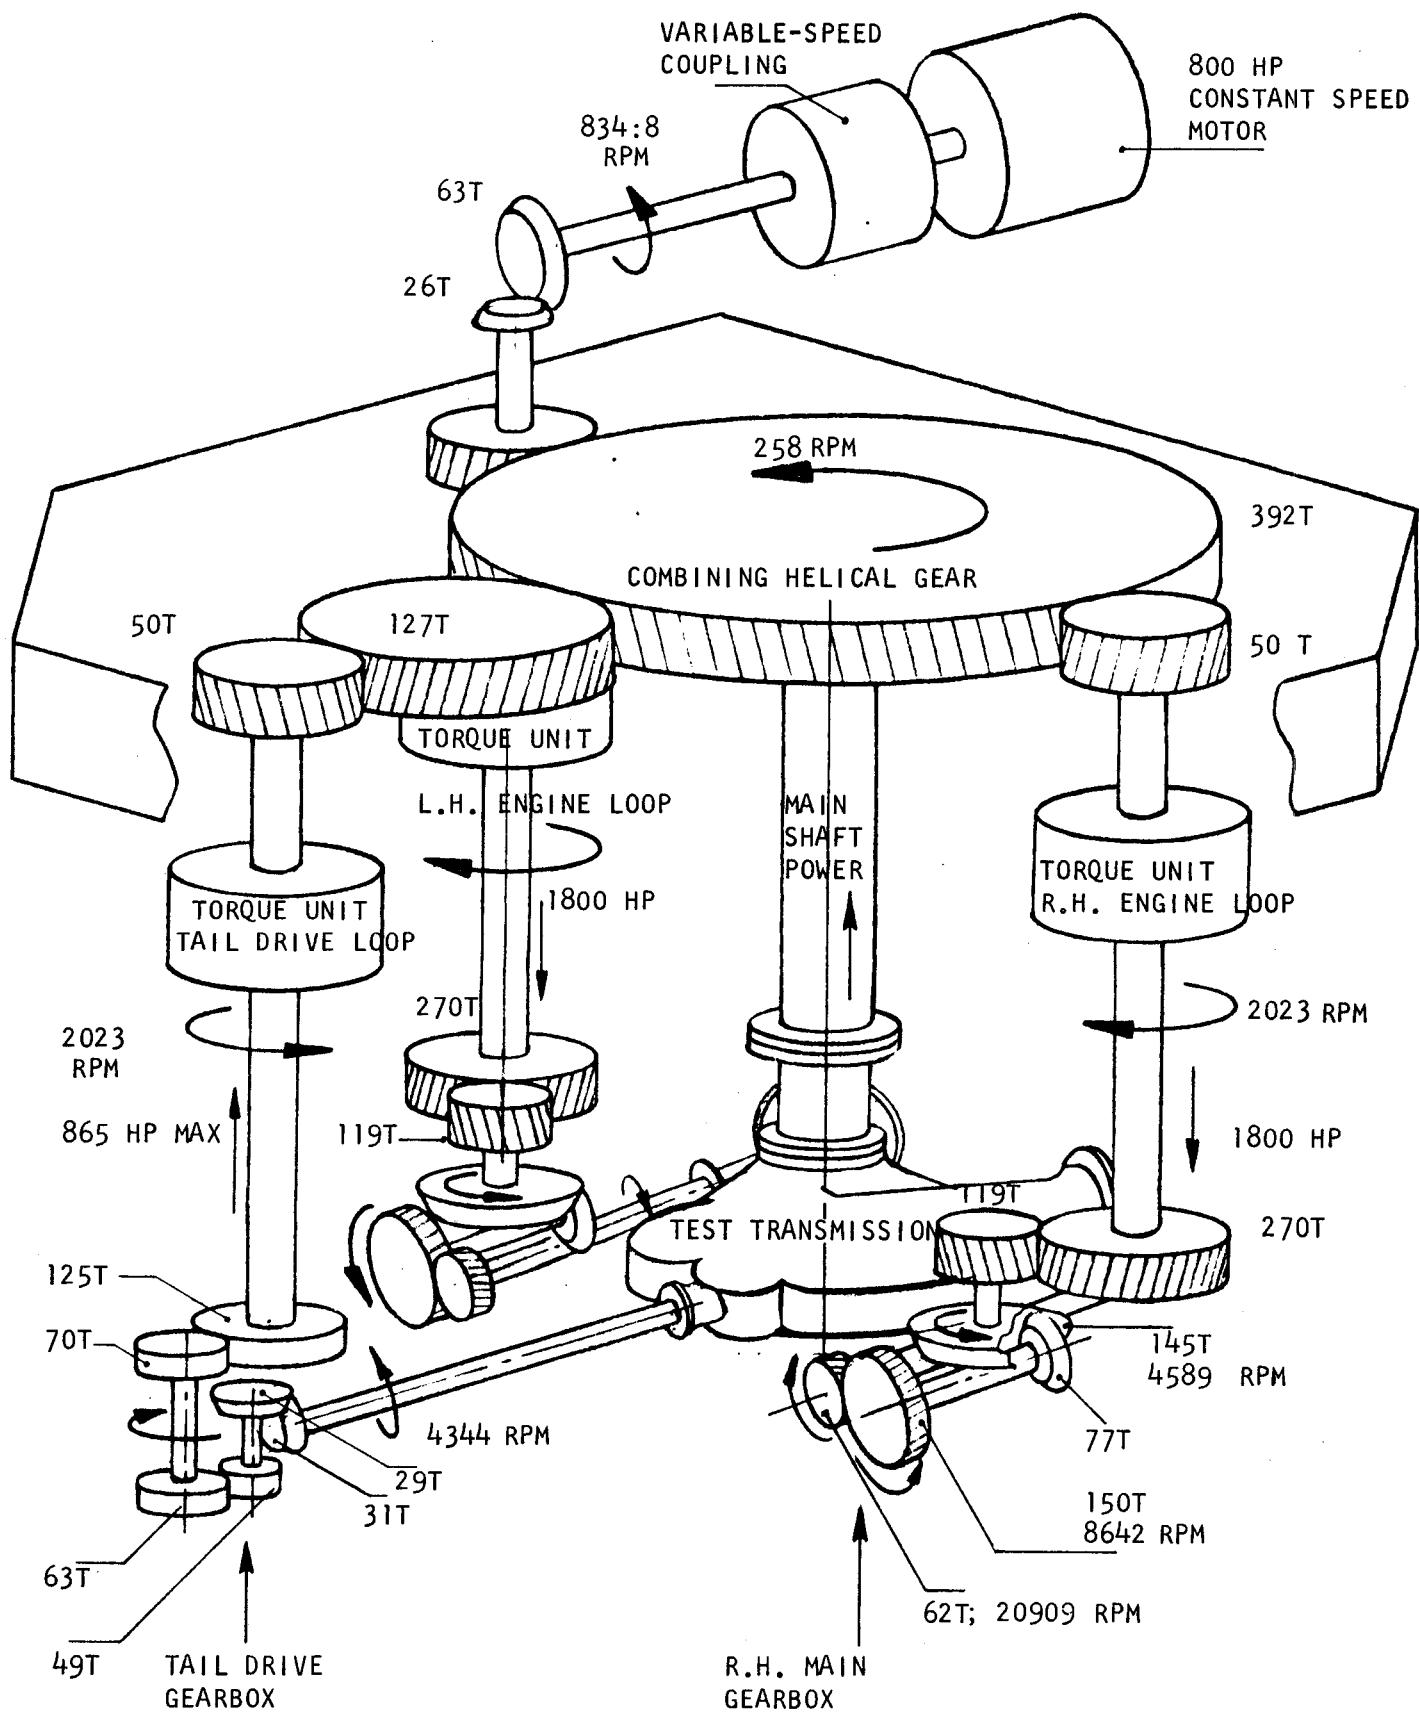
Arrangement of gear trains in helicopter transmission test stand
